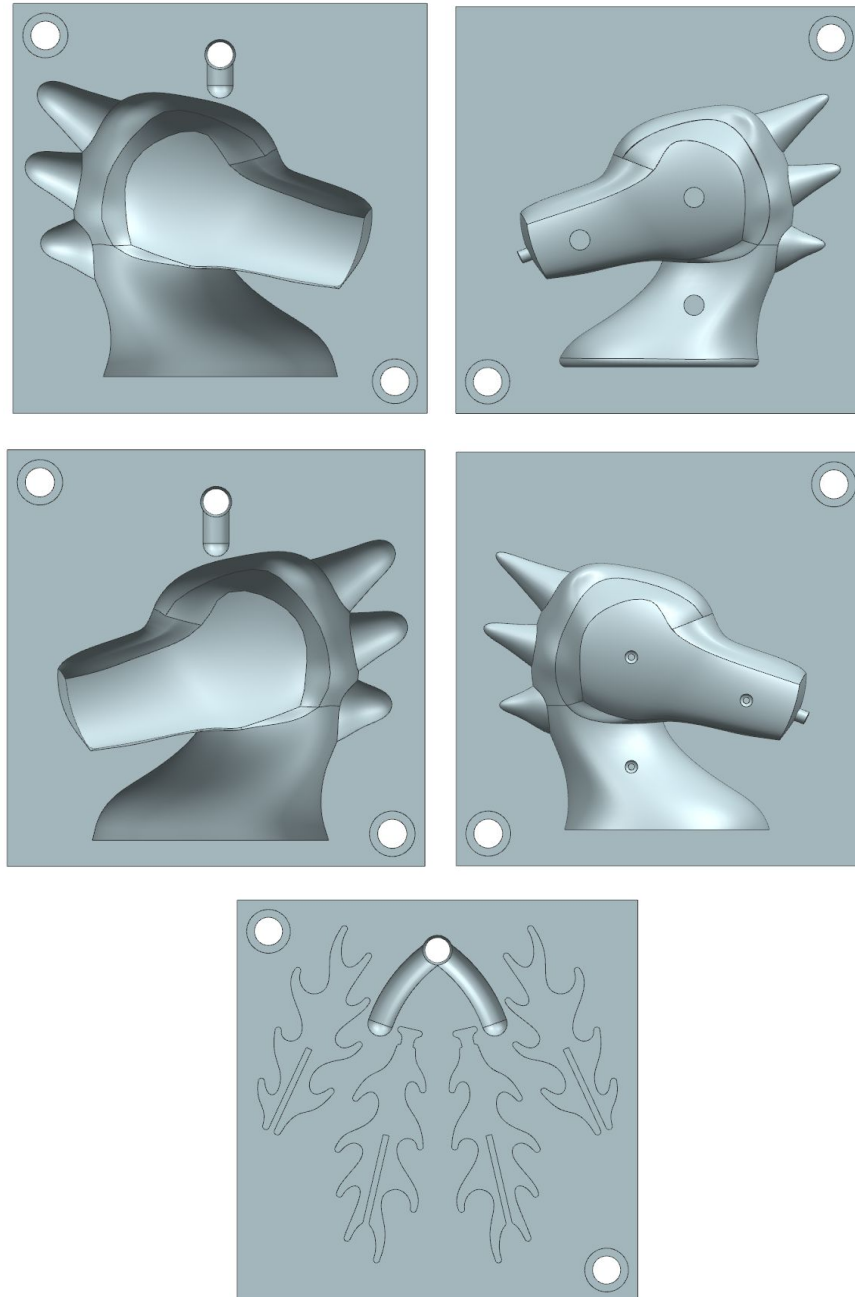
Mold Halves (from top to bottom: left core and cavity, right core and cavity, flames)
